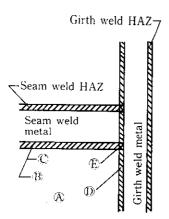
Schematic showing of the cross welded area in a DSAW-UOE pipe resulting from a seam and a girth weldings
